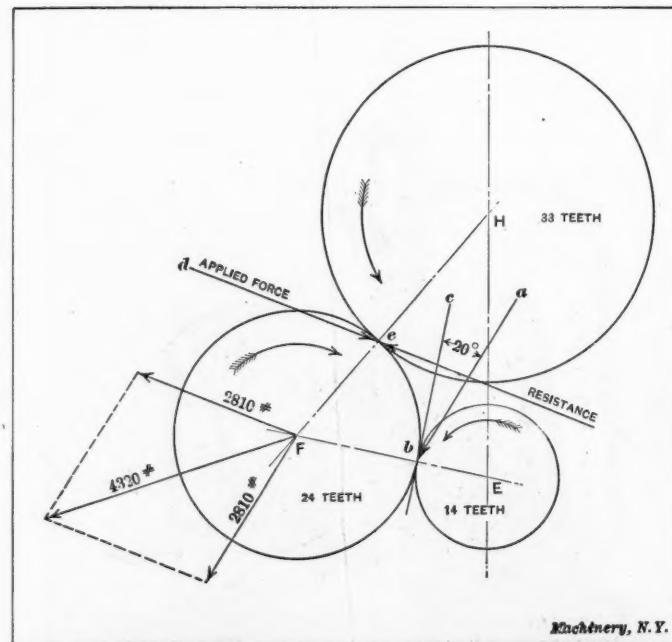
One of Two Possible Arrangements of Reverse Gearing
